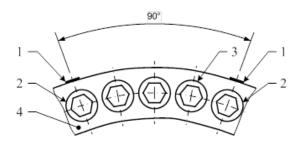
Position of the strain gauges on the gearbox flange. 1. Strain gauges, 2. Measured screws,3. Neighbouring screws/screws array between the measured screws, 4. Gearbox flange.
